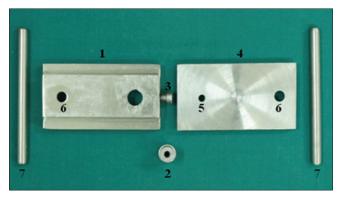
Parts of the jig. 1: Lower plate, 2: Detachable sample holder with lower mold space, 3: Screw, 4: Upper plate, 5: Upper mold space, 6: Holes for engaging rods, 7: Engaging rods
